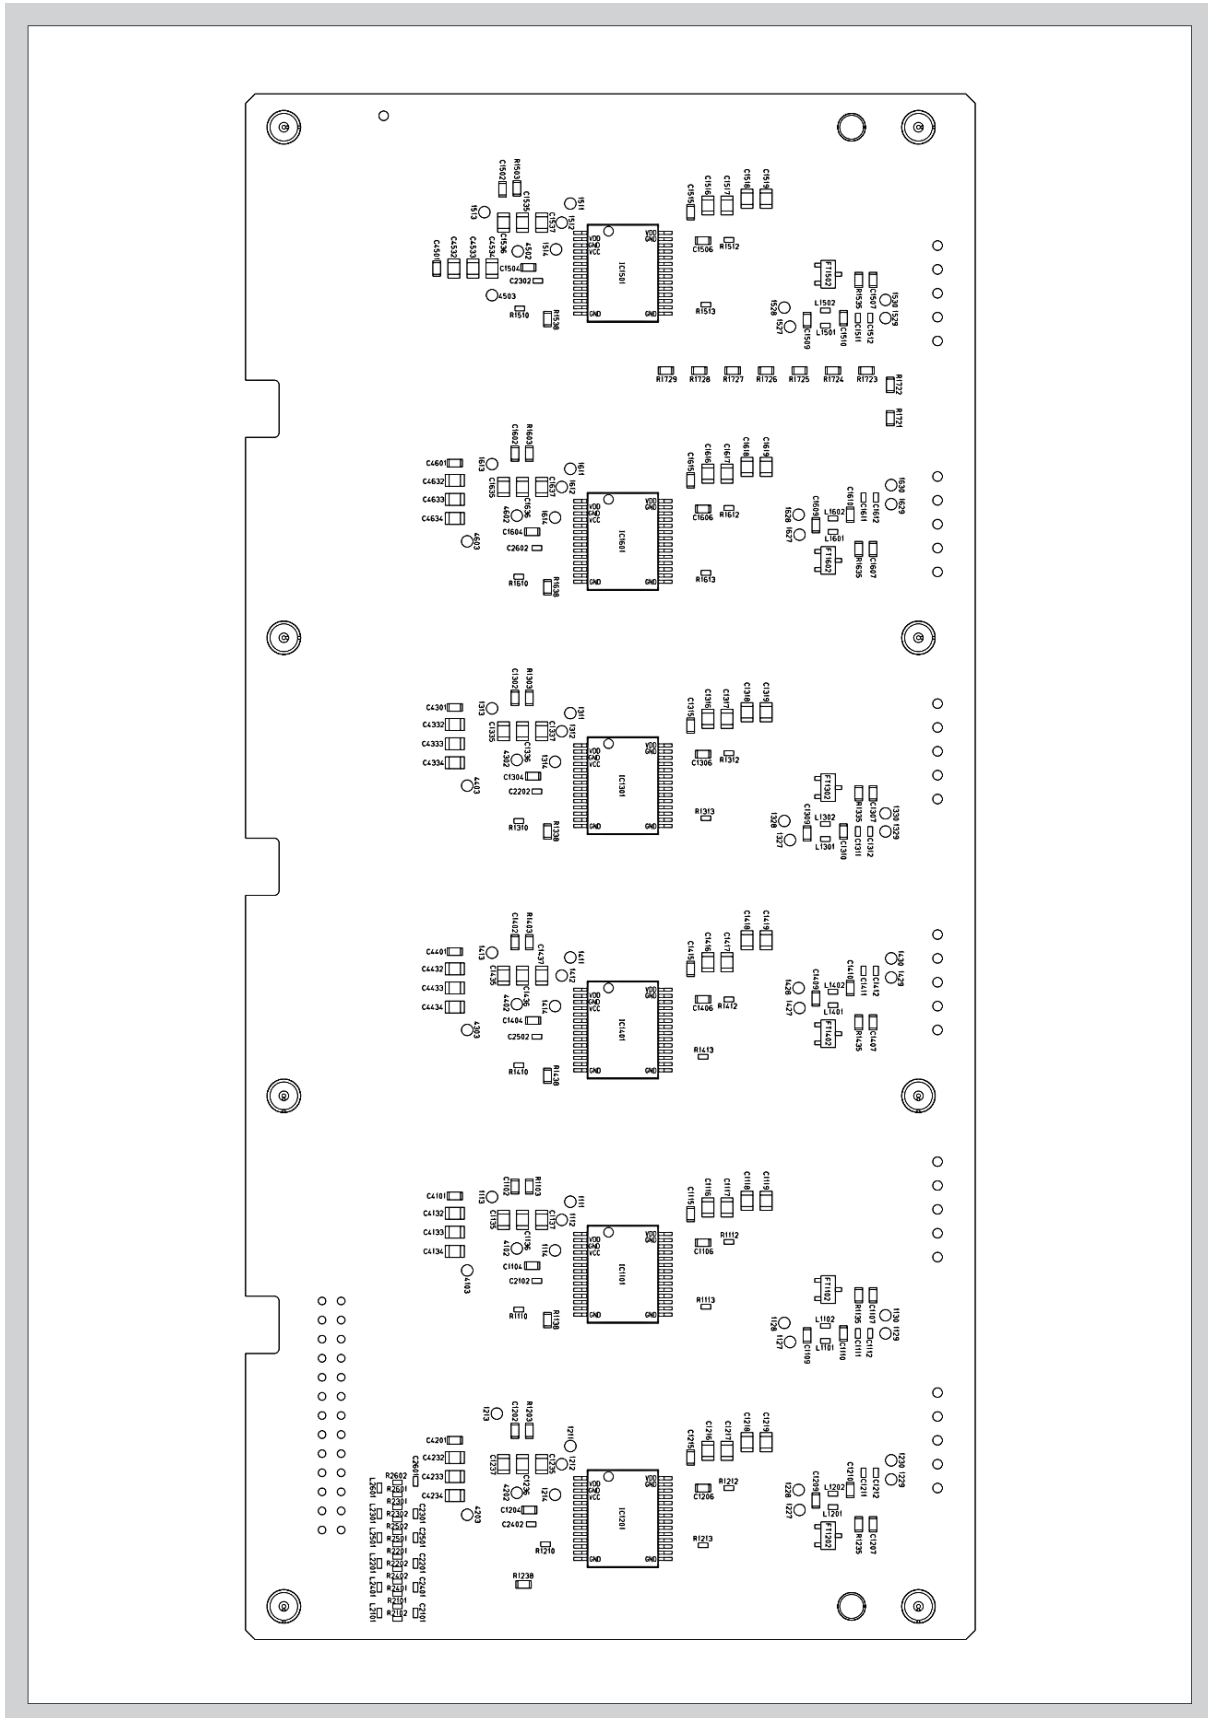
Assembly drawing of the driver board (Bottom)
